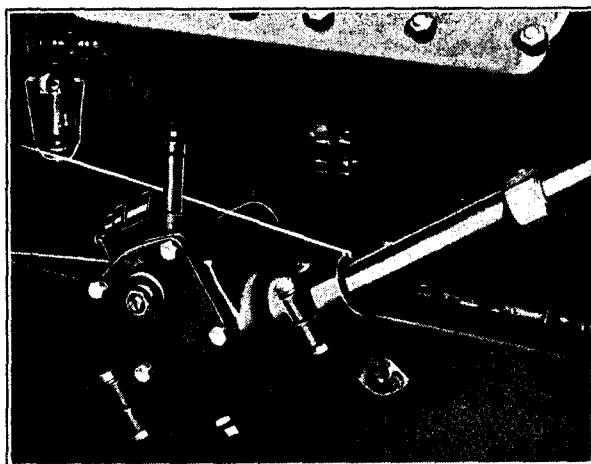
The inverted type steering gear is mounted on the outside of the frame
